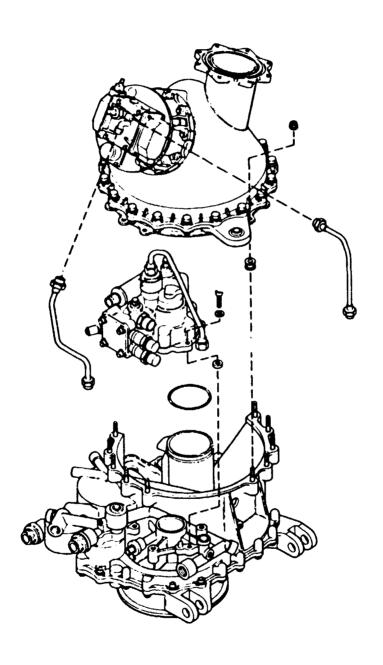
SRB APU exhaust dome and fuel pump - exploded parts.
